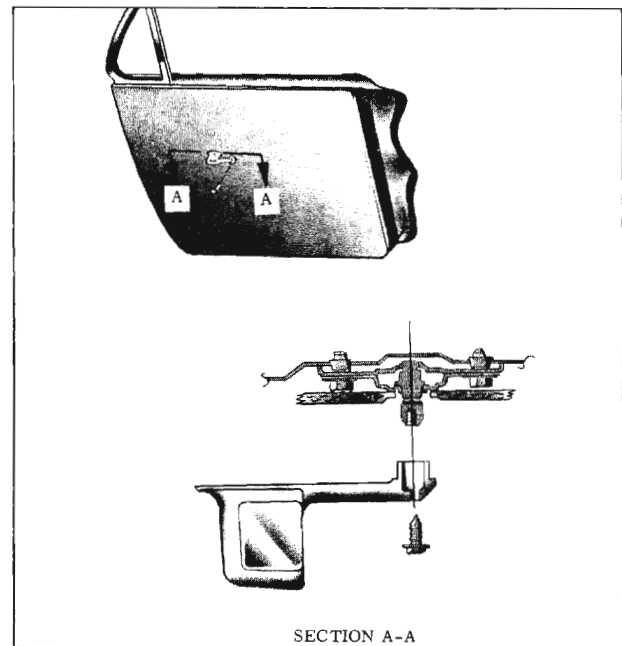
Door Inside Remote Control "Paddle" Handles
